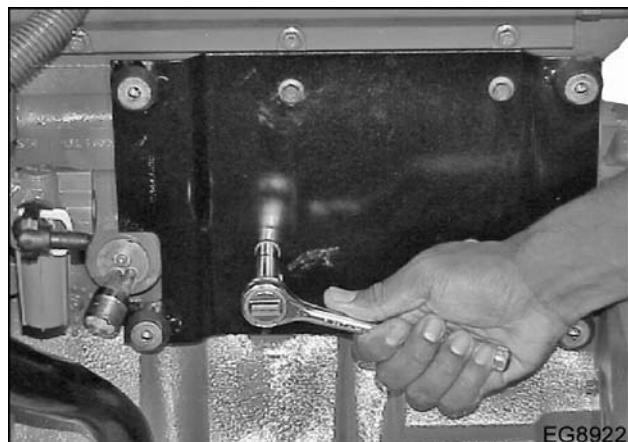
Remove bottom bracket bolts (rear mount ECM)
